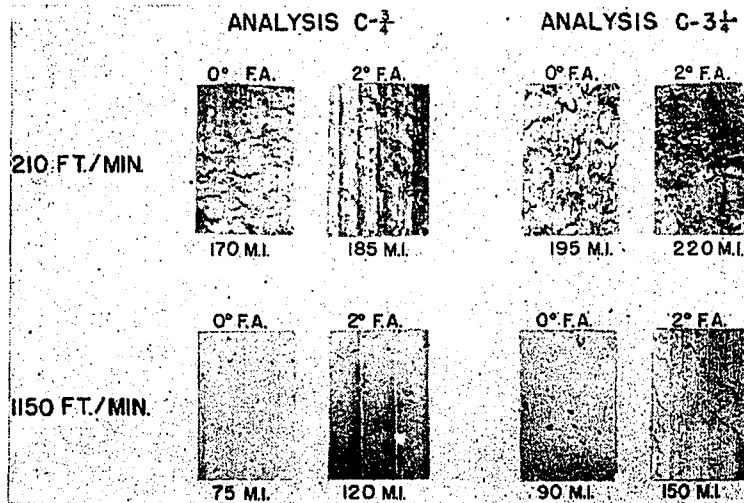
SURFACE FINISH REPRODUCED FROM FAXFILM REPLICAS [Cutter: Single tooth, 6 in. radius; (+3, +3, 30, +4). Cut dimensions: 1/16 in. depth, 6 in. width, 0.015 in. feed per tooth; X23.]
